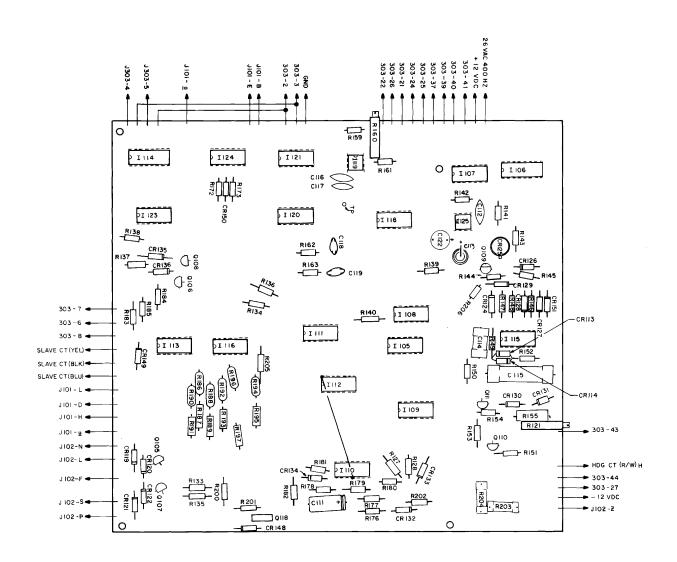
P.C. BOARD ASSEMBLY, BOARD 304, DRAWING (Dwg. 300-05988-0000 Rev. 1)
